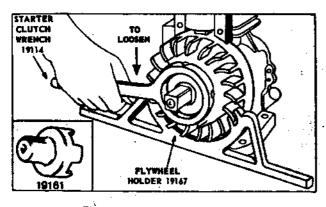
Loosening Flywheel Rewind Starter and Wind-Up Starter Engines
